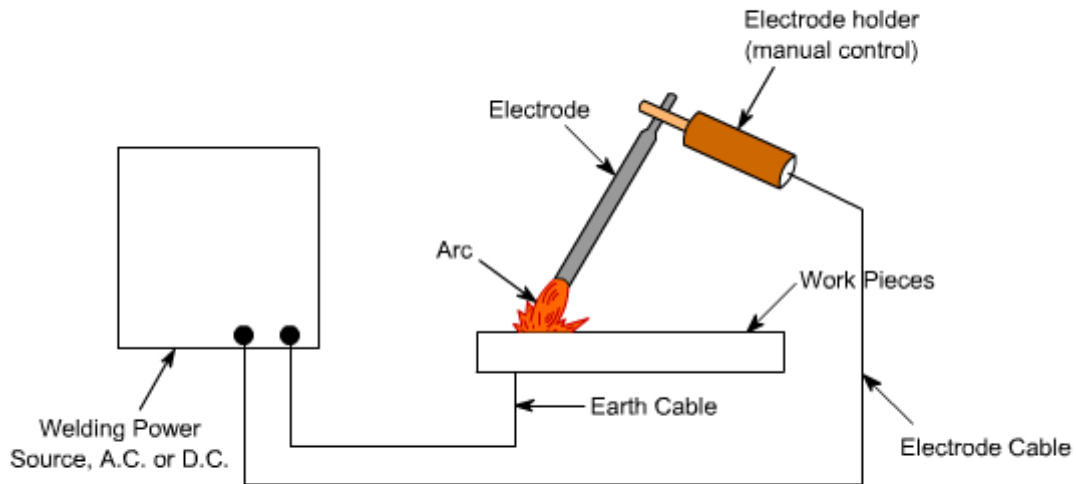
Manual Metal Arc Welding Circuit
